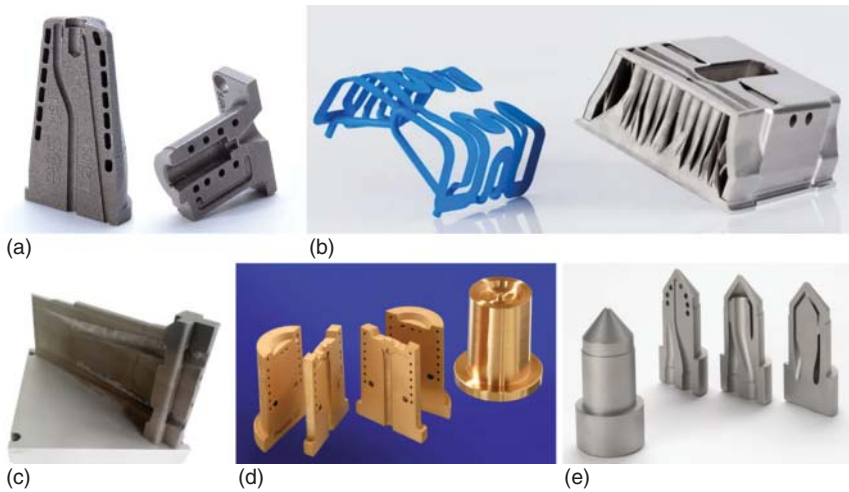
Tool inserts printed via LPBF. (a) Printed inserts for die casting, (b) lightweight Audi Hotforming Tool insert with conformal cooling channels, and (c) automotive armrest. Source: Reproduced with permission from EOS. (d) Inserts printed using Hovadur K220. Source: Reproduced with permission from Fraunhofer ILT. (e) Injection molding tool inserts after channel optimization. Source: Reproduced with permission from SLM Solutions.
